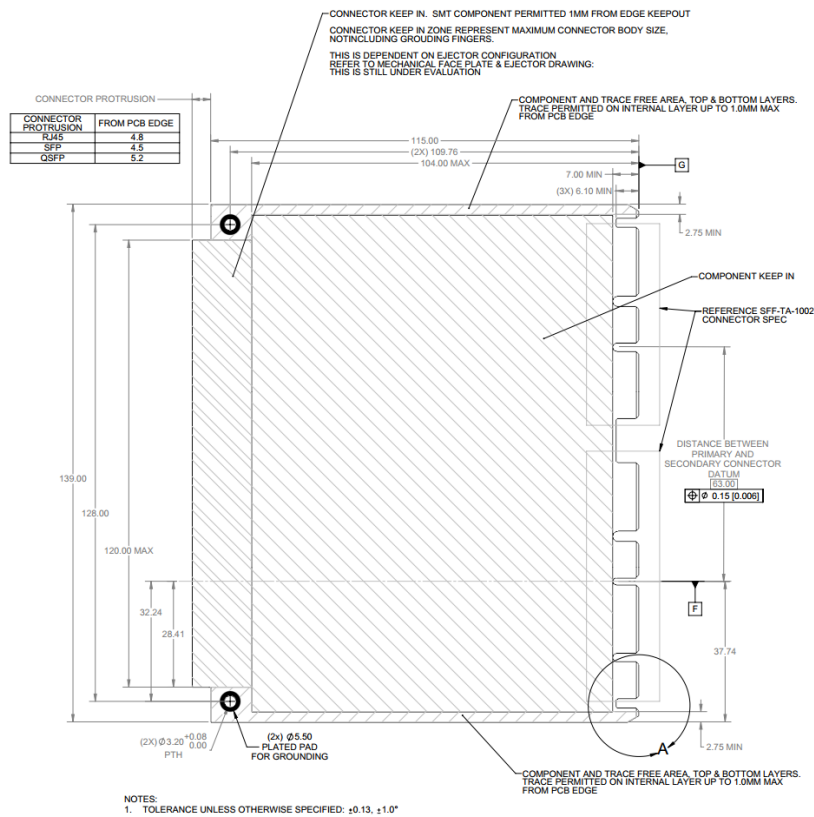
Large Form Factor Keep Out Zone – Top View – Detail A
